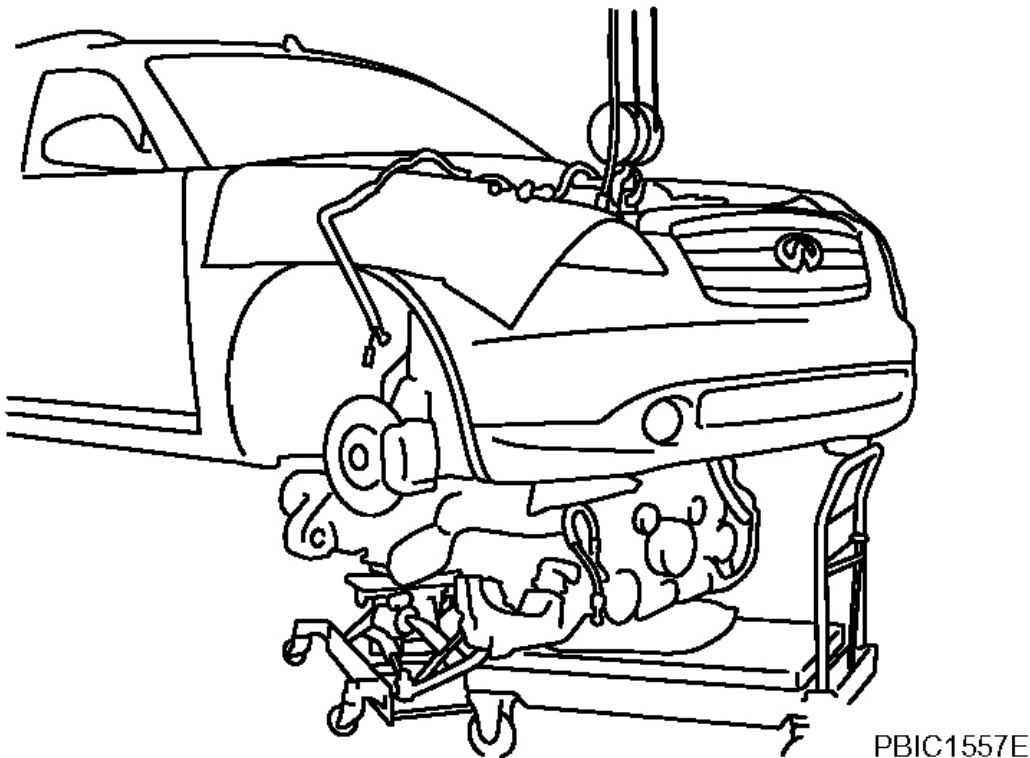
Identifying Front Suspension Member Mounting Nuts
